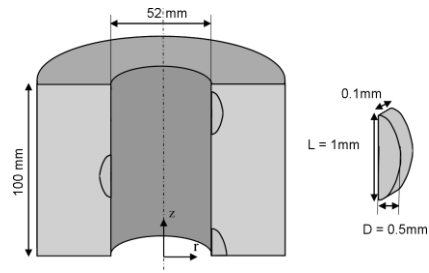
Geometries of an aeronautical fastener hole and of typical fatigue defects.
